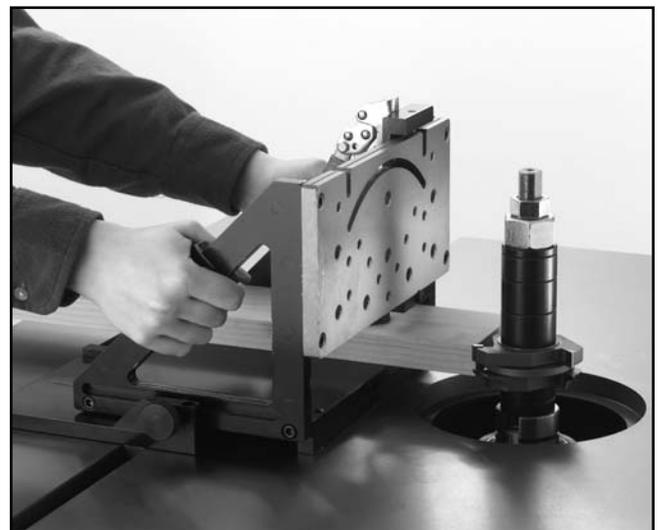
Using safety fixtures while shaping (guard removed for clarity).
